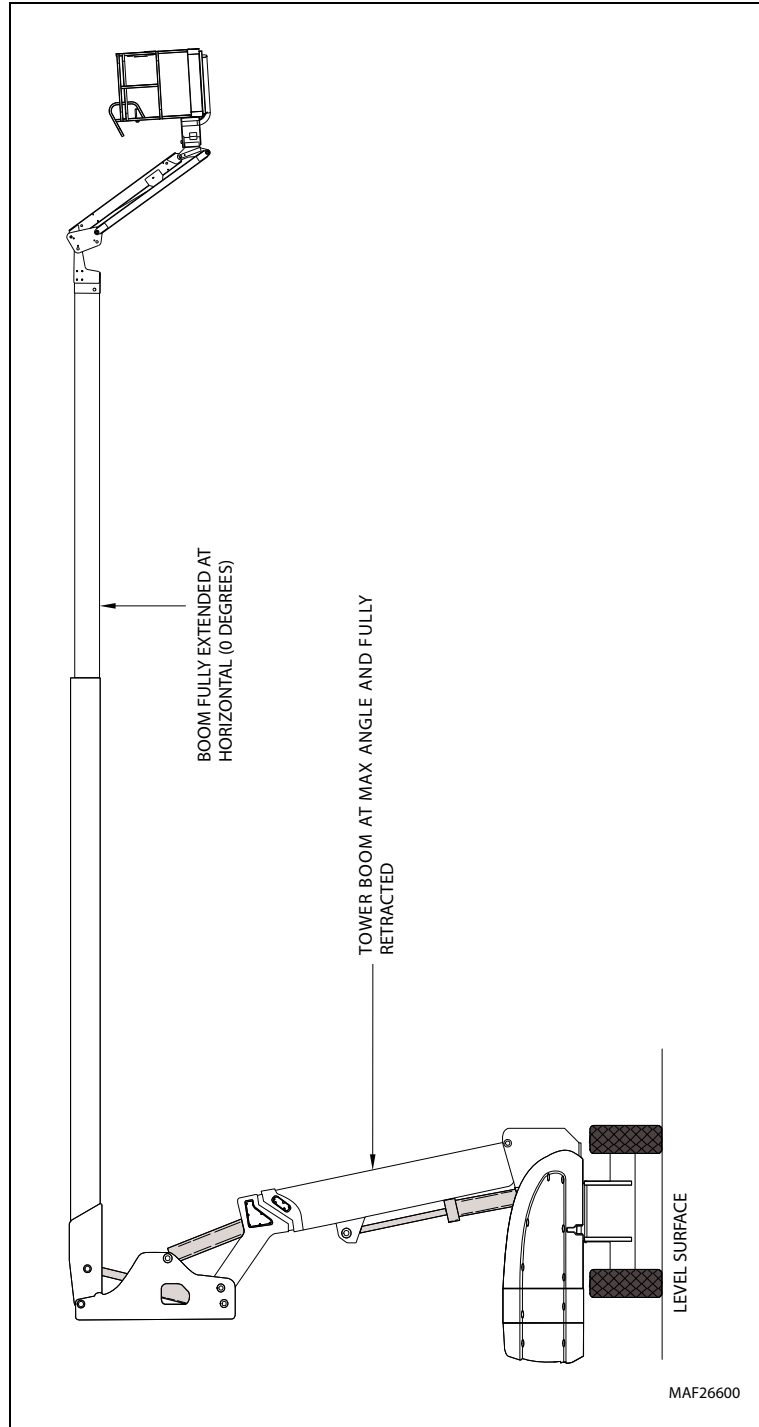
Swing Bearing Tolerance Boom Placement - Sheet 1 of 2
